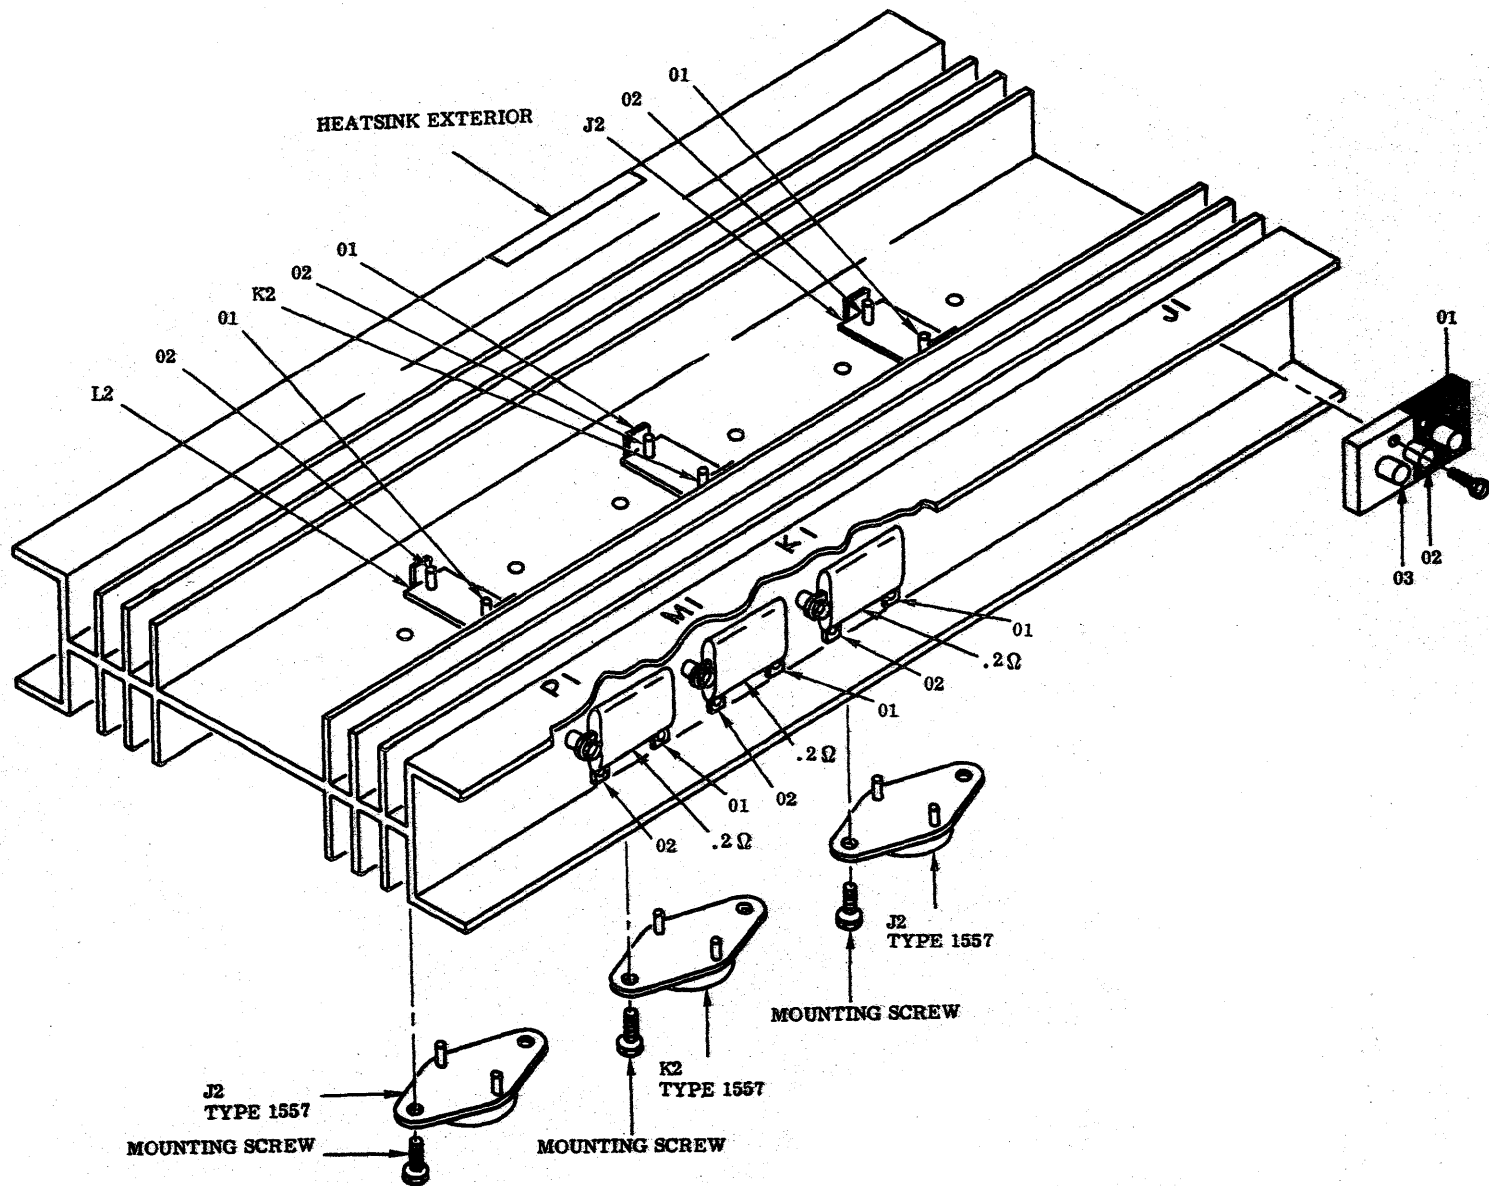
HEATSINK ASSEMBLY #11896255 (TYPE 2)
